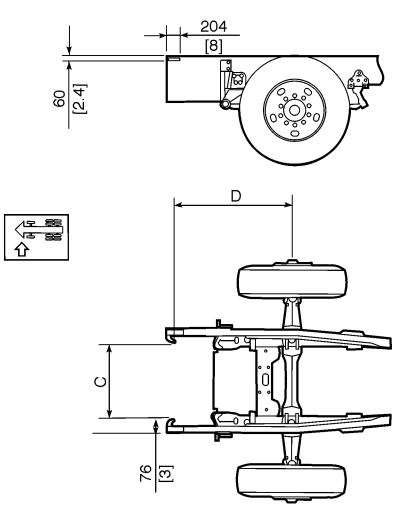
Tow Hooks, 24 in. Frame Extension (Axle Forward Configuration Shown)
